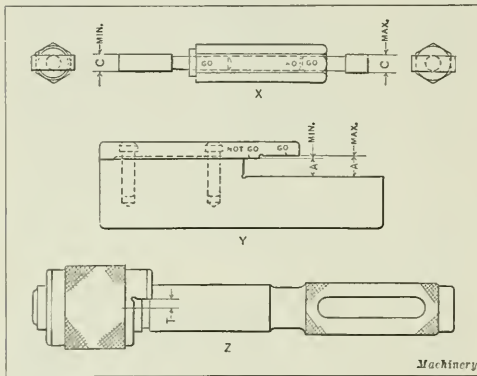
(X) Gage for inspecting Width of Reamer Slots; (Y) Gage for determining Width of Arbor Lugs; (Z) Gage for testing Alignment of Lugs on Collar
